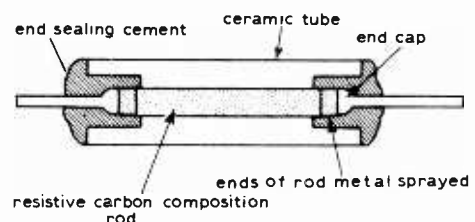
Assembly of a ceramic tube type insulated carbon composition resistance.
